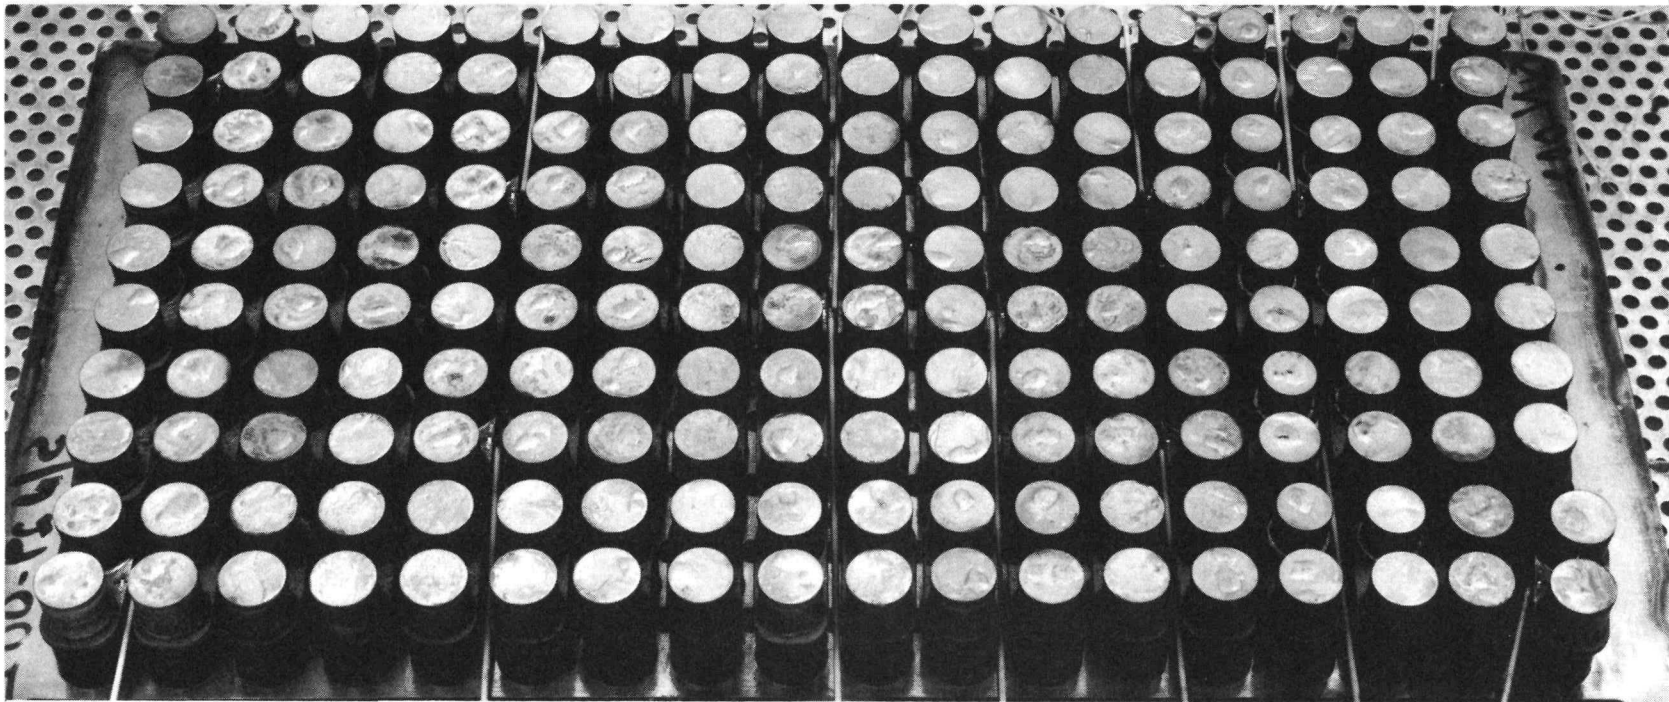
COLD END  $\Delta T$  TEST COUPLES MOUNTED ON BONDING TOOL PRESSURE PLATE. (NOTE PRETINNED COLD END CAPS)
